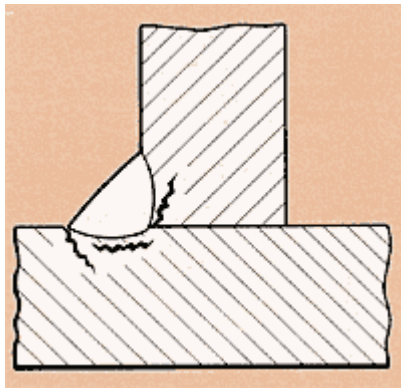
Hydrogen cracks in HAZ of fillet weld
